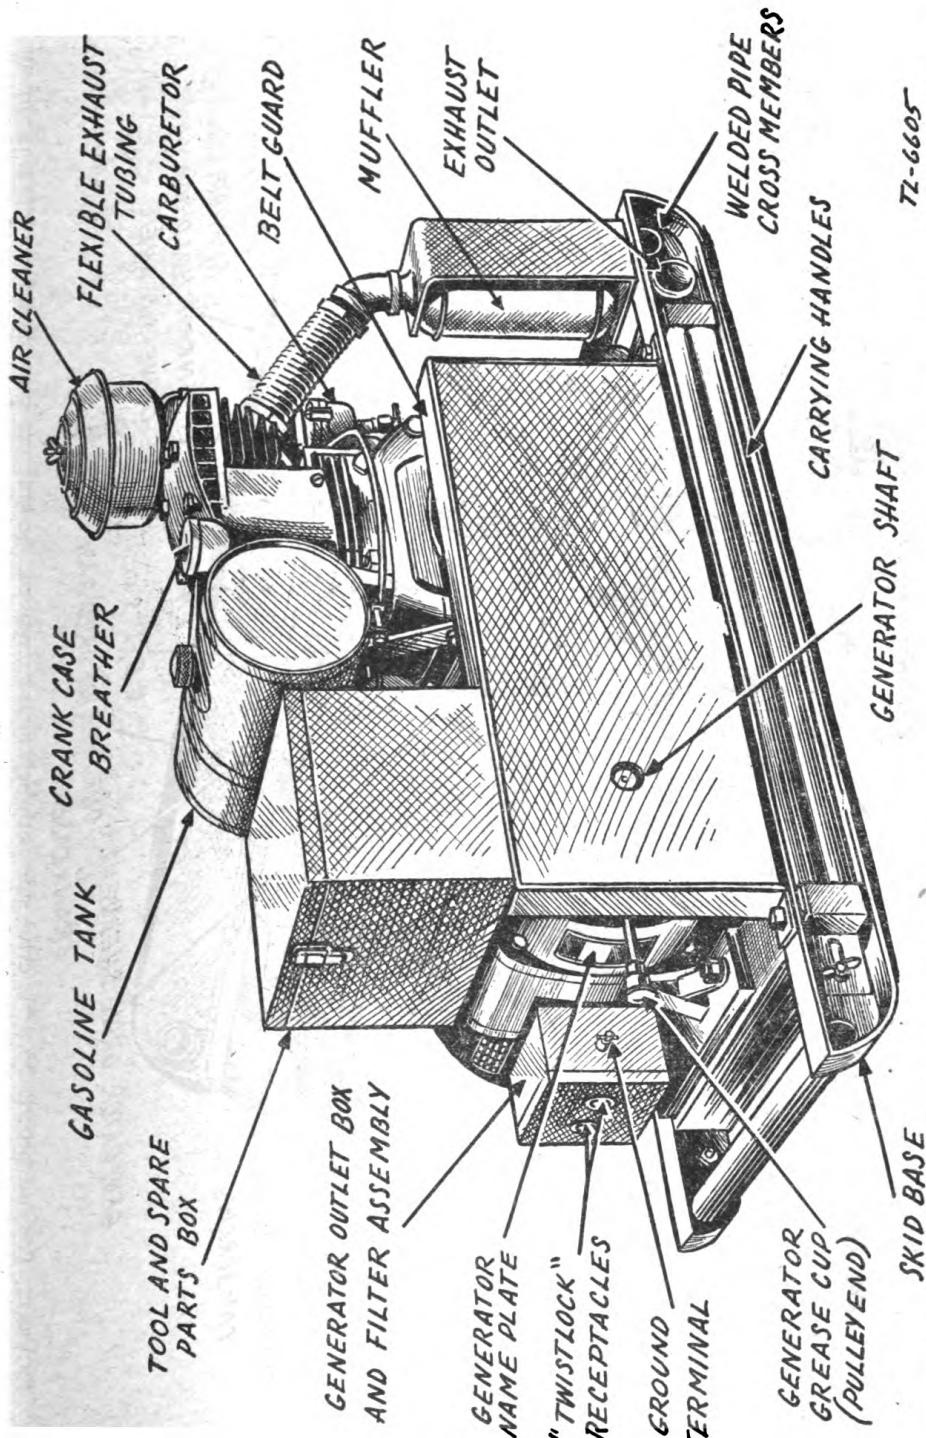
Power Unit PE-75-(*), drive side, showing one type of muffler mounting and carrying handles carried in skid base.
